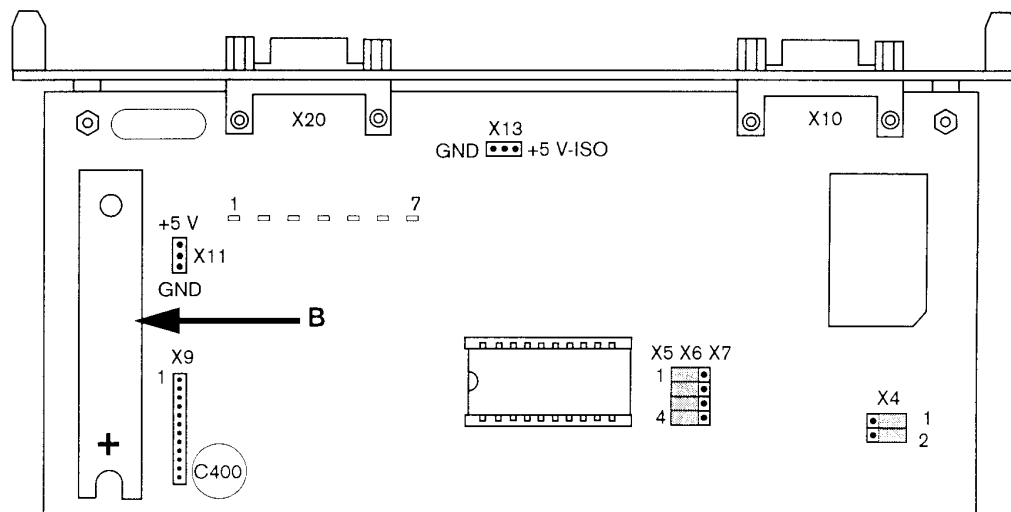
Component mounting diagram CPU PCB (replacing the batteries)
